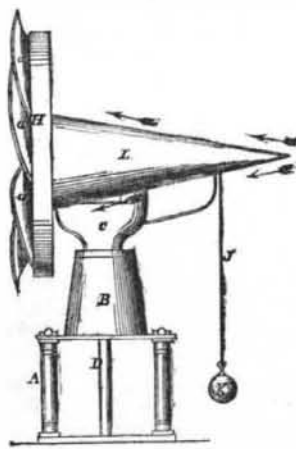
represents a back elevation of the wind-wheel; Fig. 2 is a side elevation; and Fig. 3 is a side sectional view. A is a suitable framing on which a block, B, is
